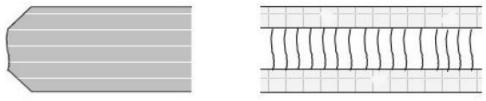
ARRISED EDGE (WITH BLANK SPOTS)
